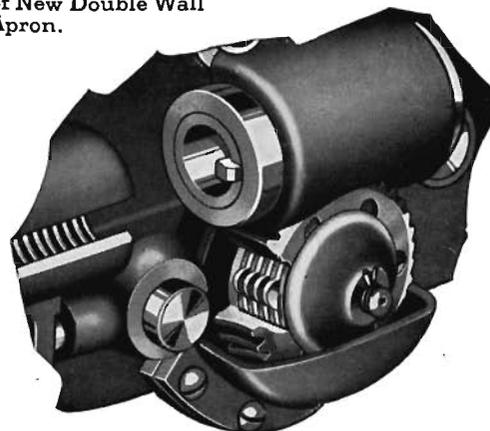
(Above) Cut-away View Showing the Multiple Disc Friction Feed Clutch.
